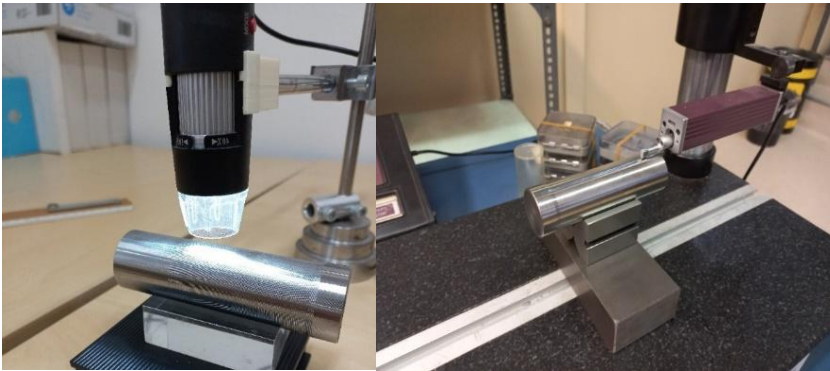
Measurement and testing of the three machined specimens for surface roughness analysis: a) Digital microscope b) Mitutoyo SJ-301.
